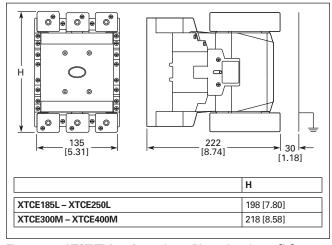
XTCEXTLA — Approximate Dimensions in mm [in]
